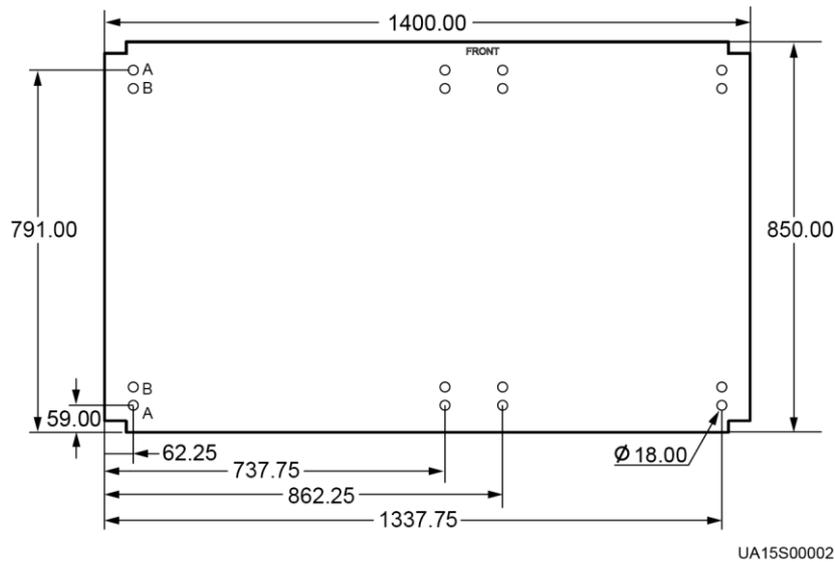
Mounting hole dimensions for the 600 kVA UPS (unit: mm)
